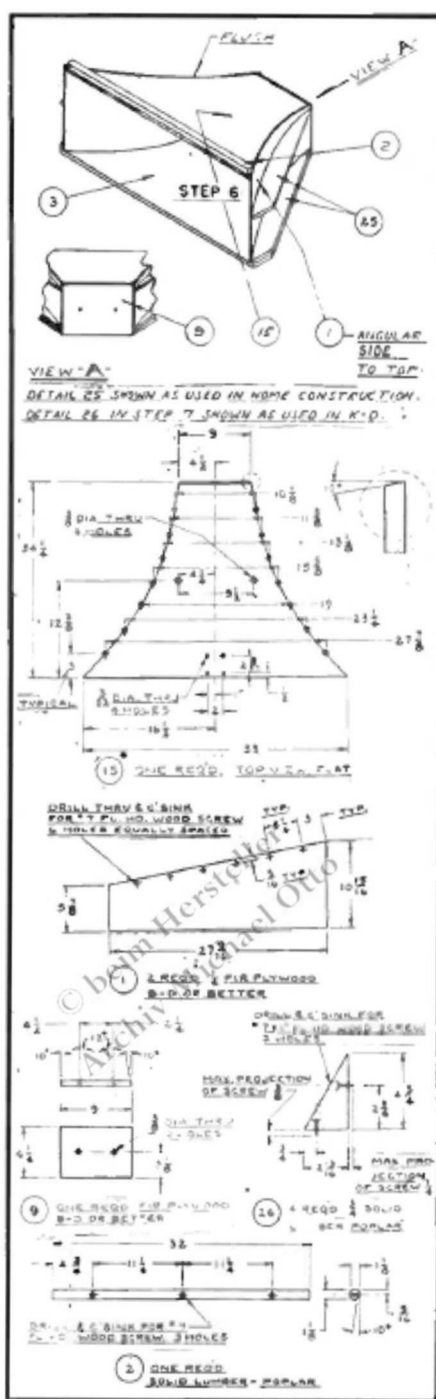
Wood parts and assembly for the diffraction horn assembly which tops the low-frequency section.
